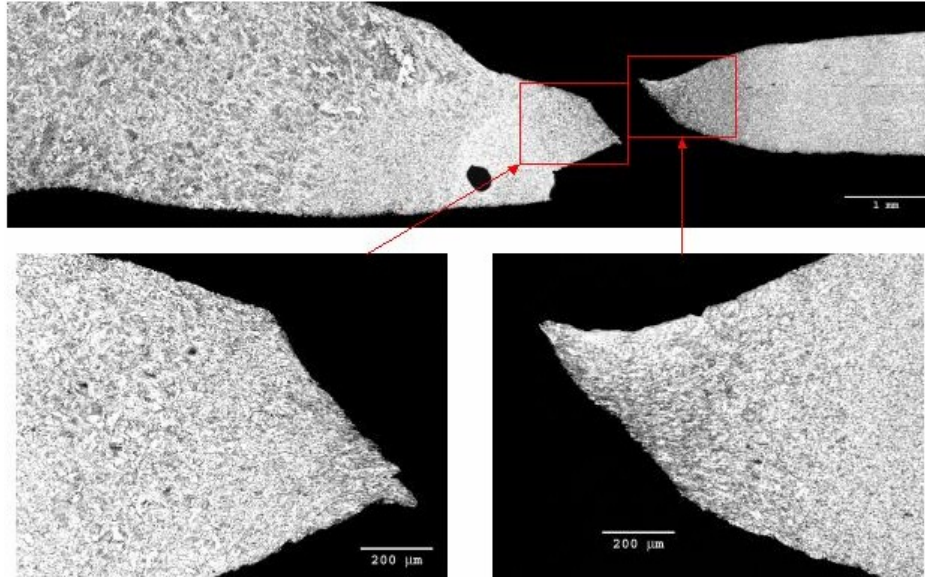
Metallographic cross section of tear #9. This sample contained a single repair weld. Grinding on the outside surface ended abruptly at the edge of the back-up bar, resulting in a deep but narrow region of liner thinning. Tearing occurred in the heat affected zone adjacent to the weld, and was accompanied by substantial localized plastic deformation.
